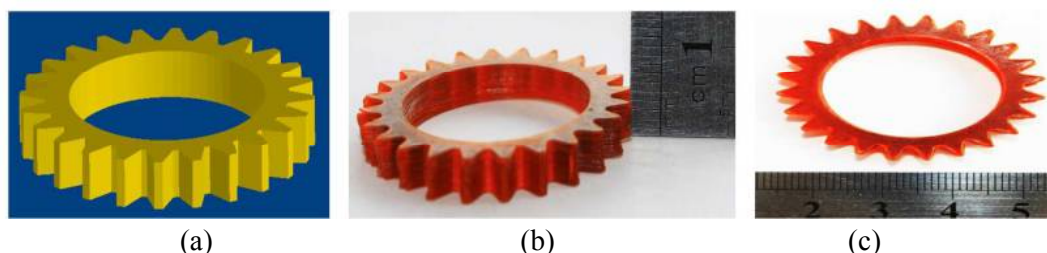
Gear- (a) Isometric view of STL Model; (b) Isometric view and (c) Top View of Built Part
